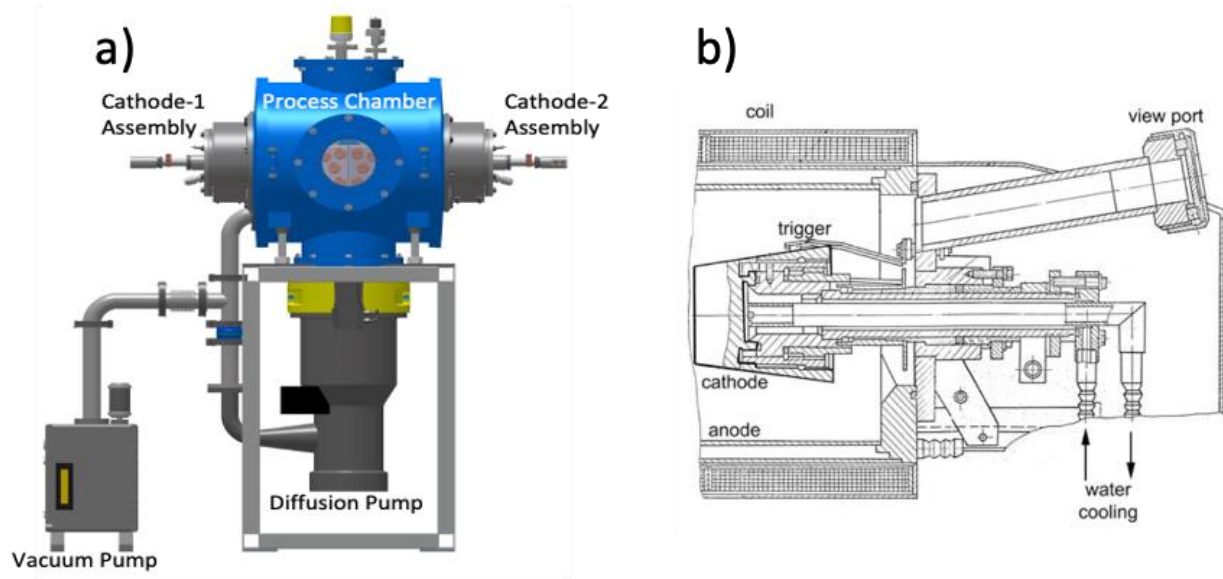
a) In-house assembled VAPD system b) Bulat cathode design used [2]
